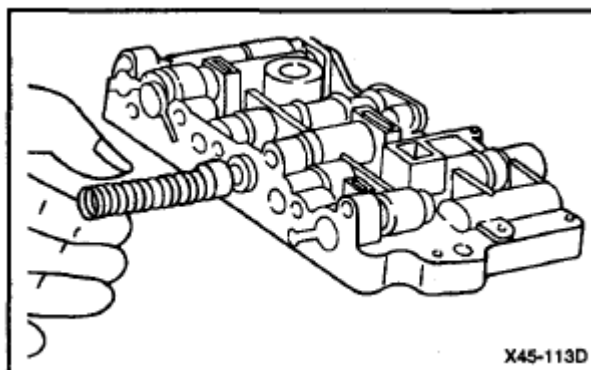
Removing/Installing Regulator Valve & Regulator Spring
